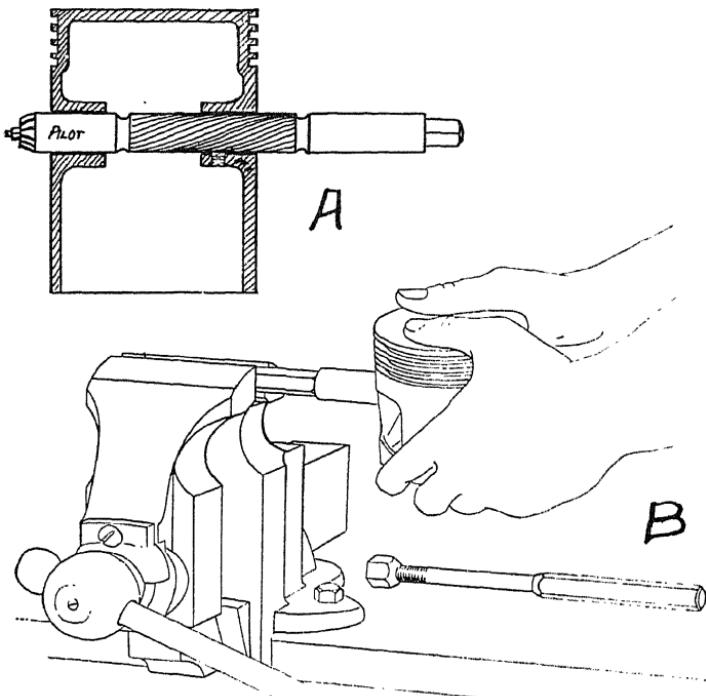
Reaming and Burnishing Piston-Pin Holes
